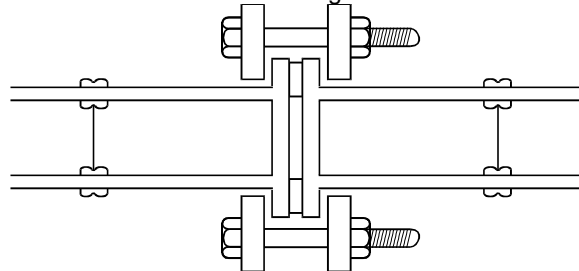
Section through typical test piece for the testing of flange assemblies (for clarification only)
